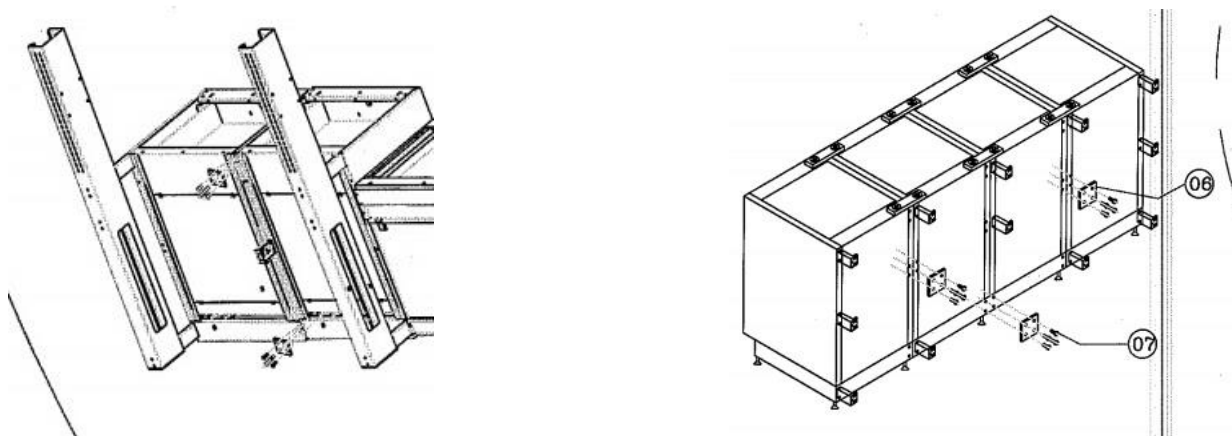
TYPICAL UNDERBENCH SUPPORTING DETAILS
